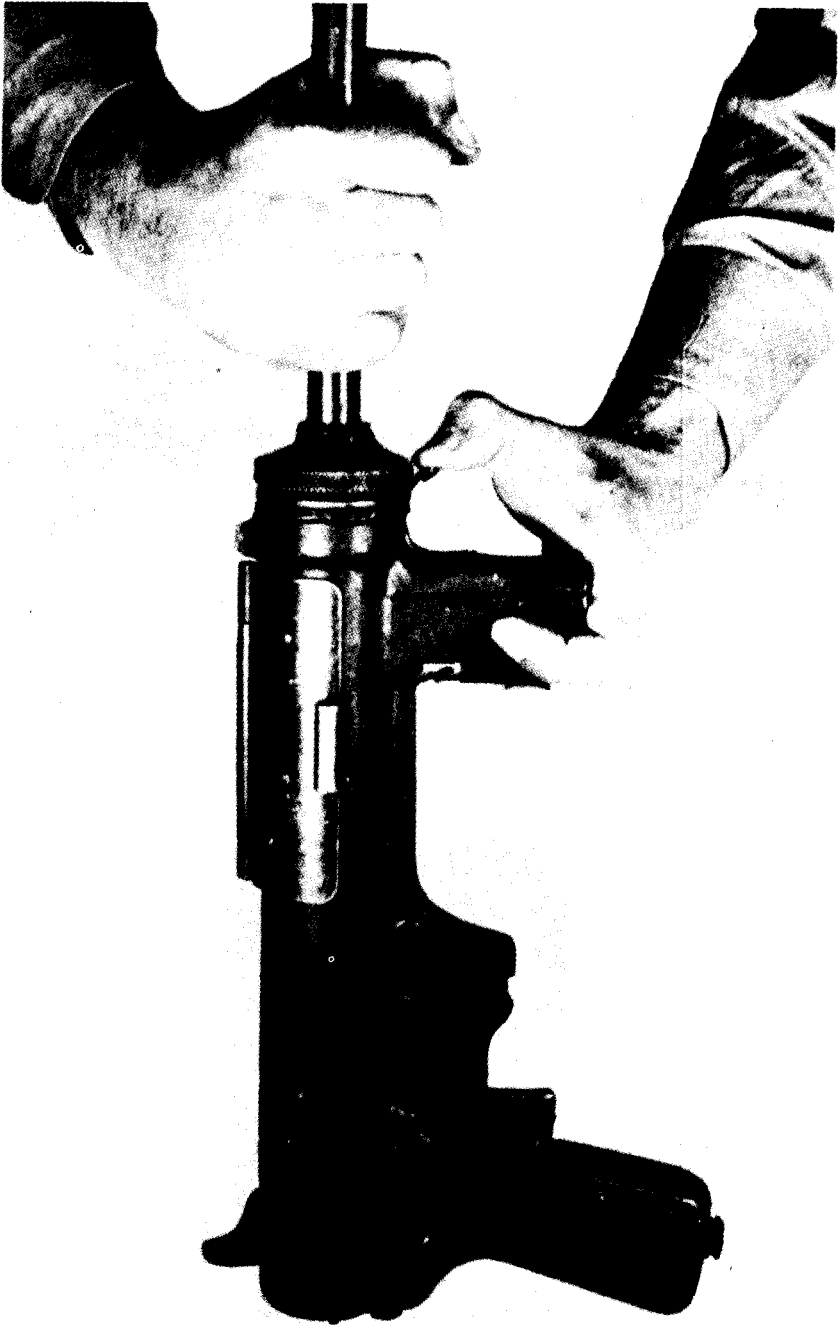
To remove the barrel, make sure the bolt is forward, depress the barrel ratchet, and unscrew the barrel. Do not allow the barrel ratchet to contact the notches in the barrel collar when removing or replacing the barrel.
